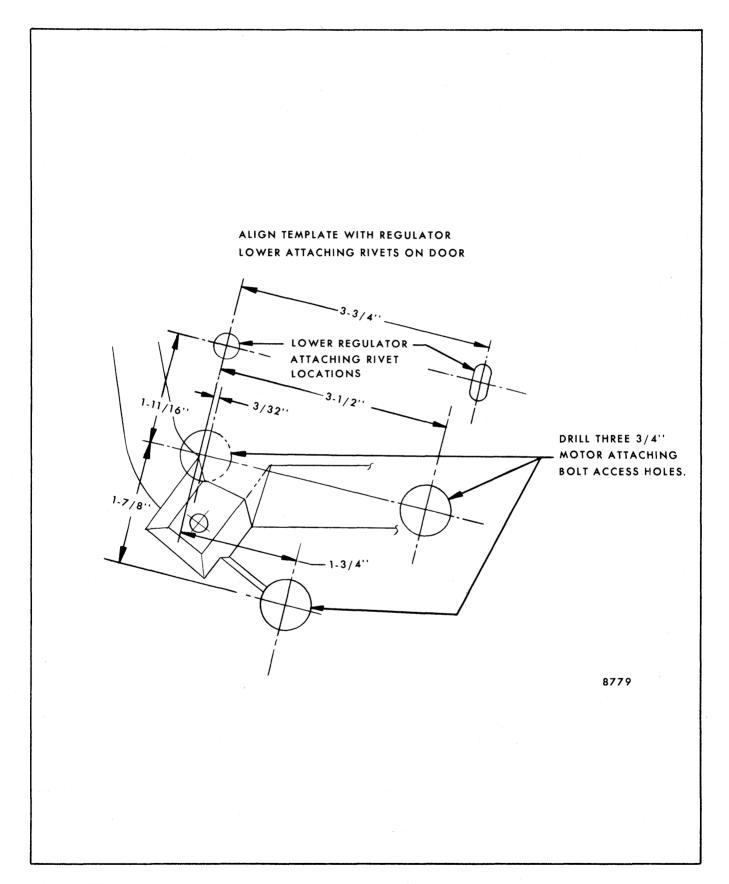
Window Regulator Lower Attaching Rivets Reference Point for Locating Window Motor to Regulator Attaching Bolts
